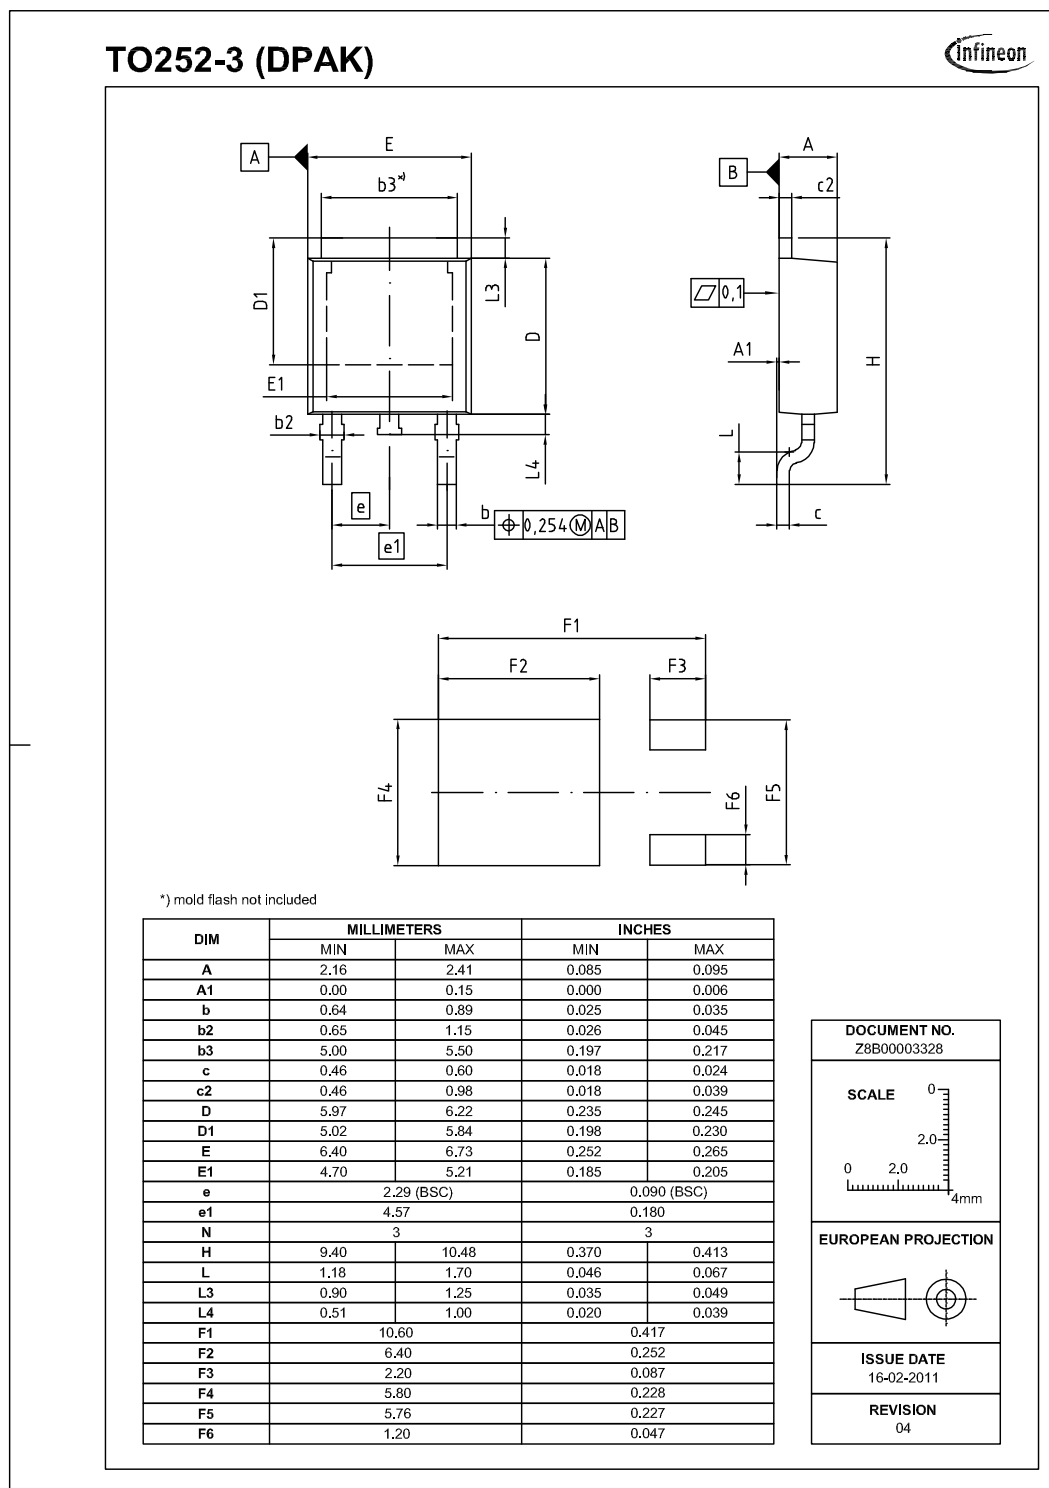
Outline PG-TO 252, dimensions in mm/inches
